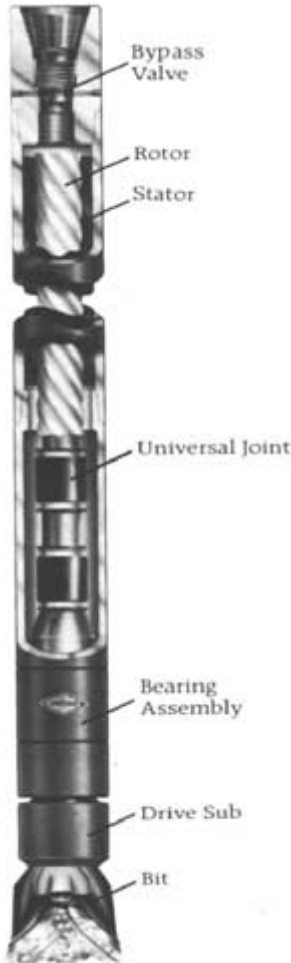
Cutaway view of a typical 5:6 lobe configuration positive displacement mud motor (courtesy of Baker Oil Tools).
